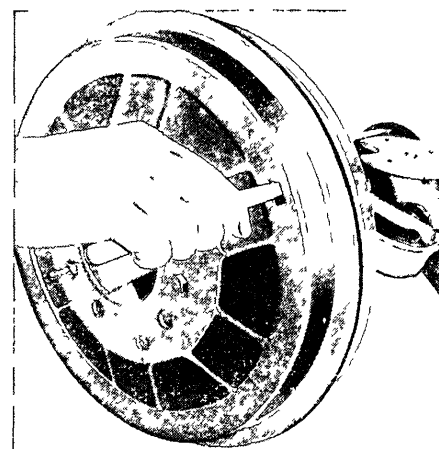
Using feeler gauge to check clearance between drum and brake lining on Bendix brakes
